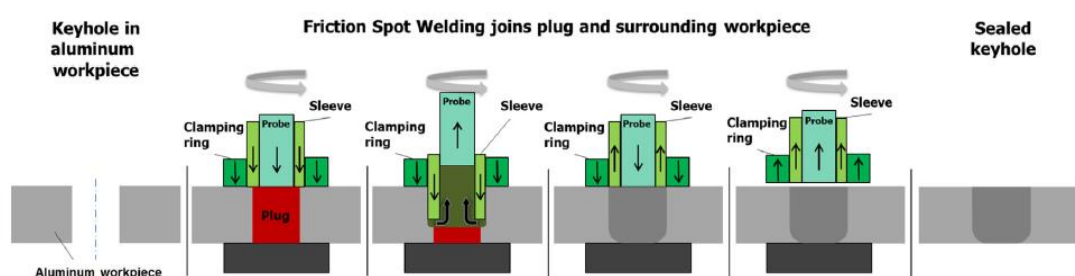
Schematic drawing of the RFSSW exit hole closure process (Reimann et al. 2016).
